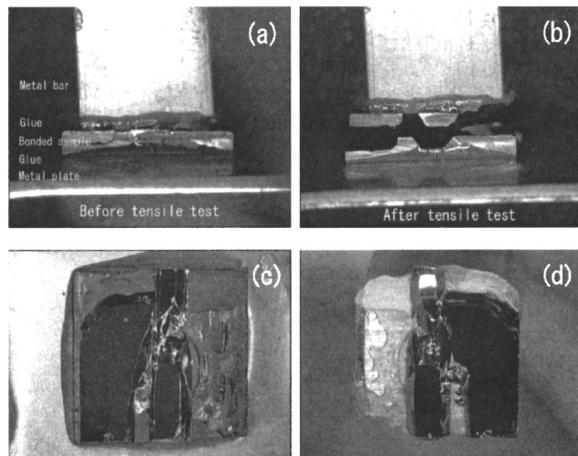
Fracture image of Cu–Cu interface by tensile test. Side view of bonded sample (a) before test and (b) after test. (c) (d) Top views of the debonded sample; where bulk fracture across the diffusion barrier layers is seen.
